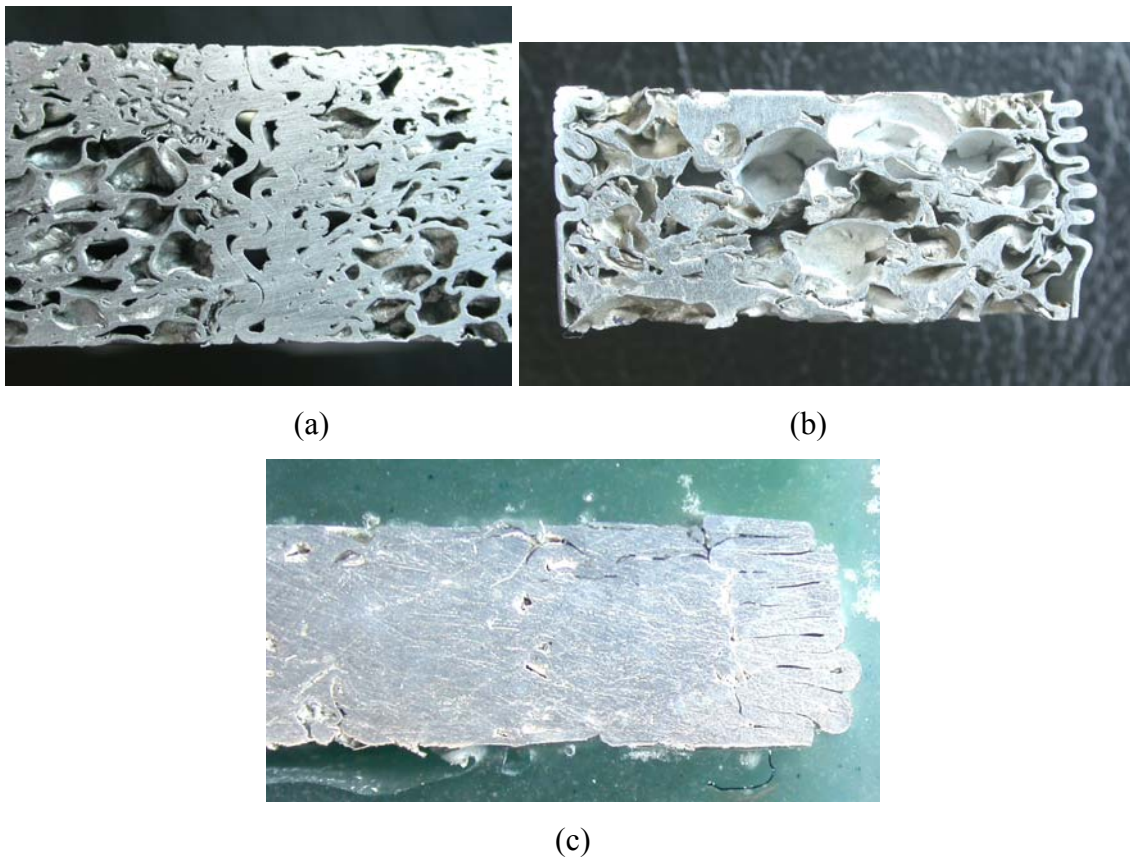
(a) neighboring tubes in hexagonal packed multi tube geometry (b) al foam filled tube taken from cubic packed design (c) crushed al foam filled single tube
